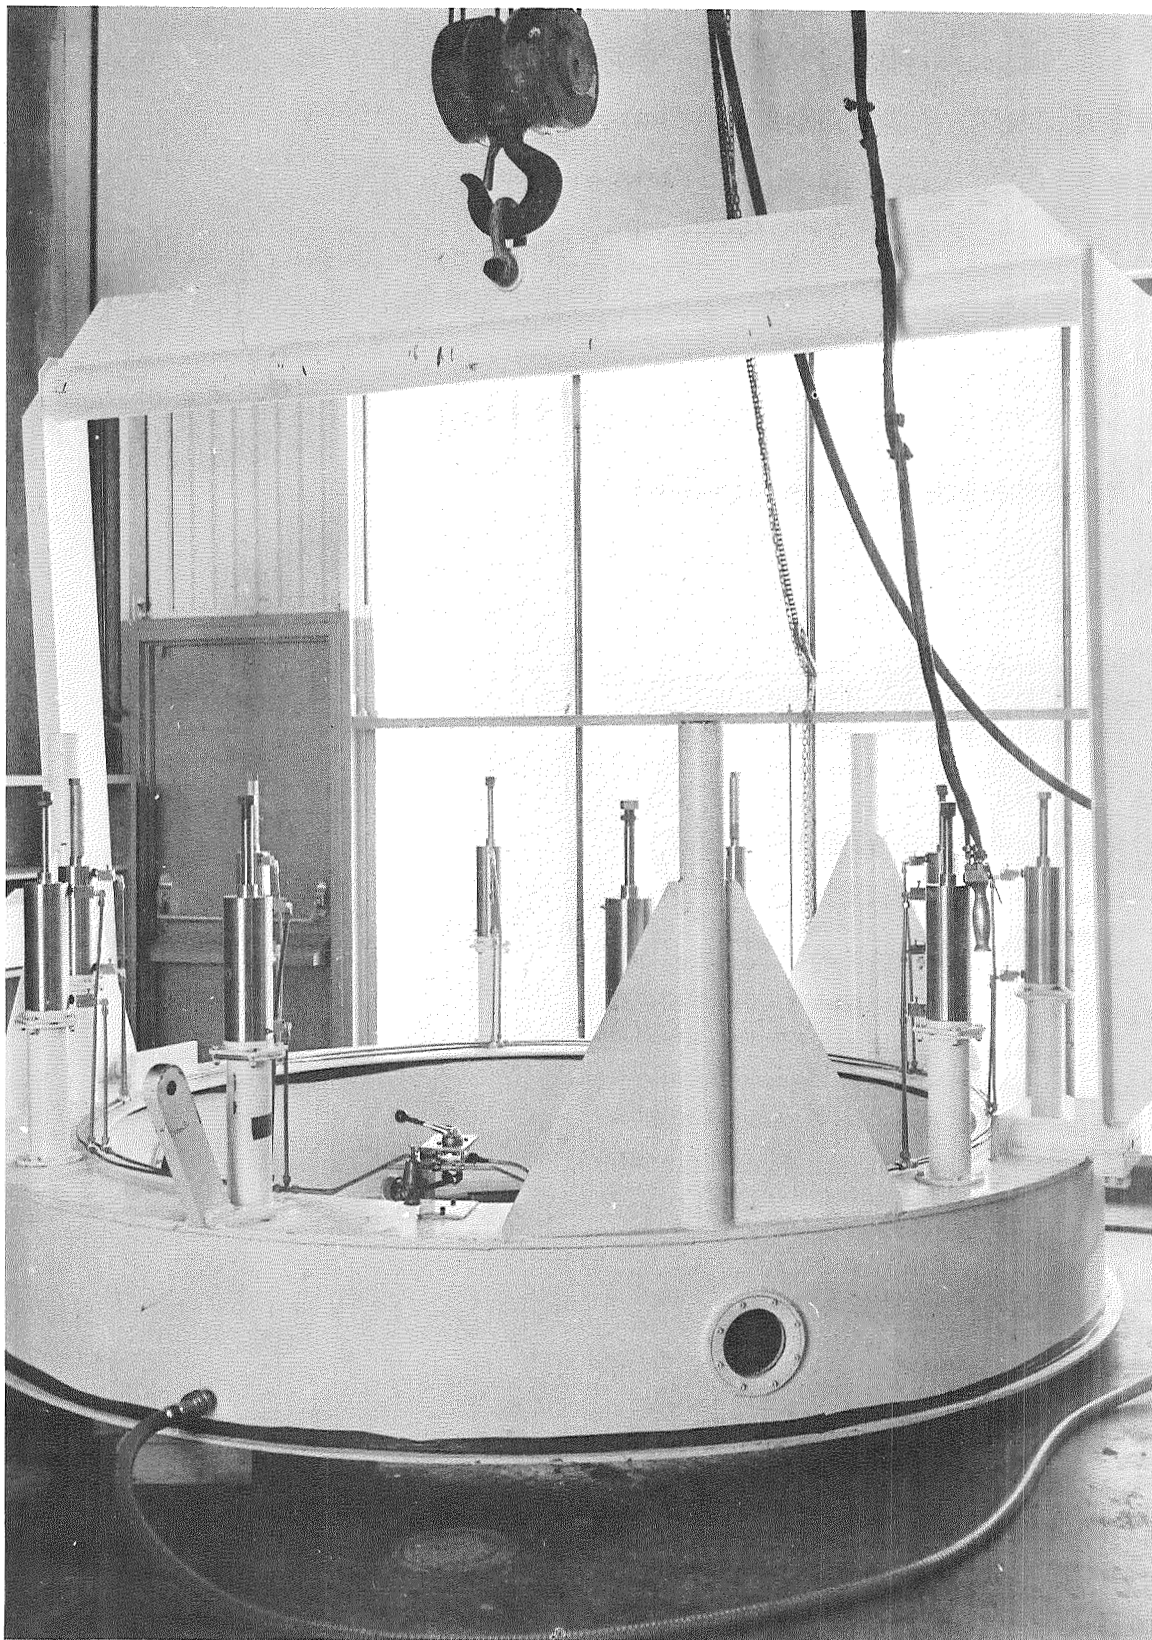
Prepare the Bond Fixture for Adhesive Cure
